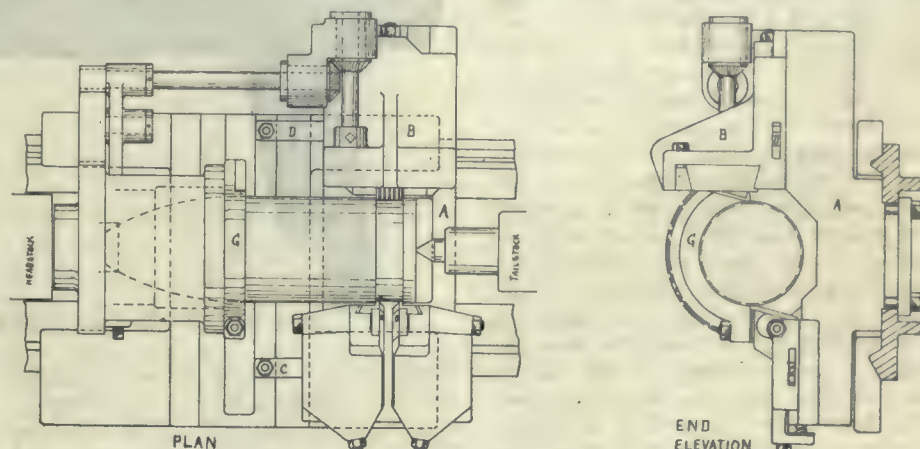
DETAILS OF GROOVE-FORMING ATTACHMENT FOR SPECIAL SHELL LATHE.
